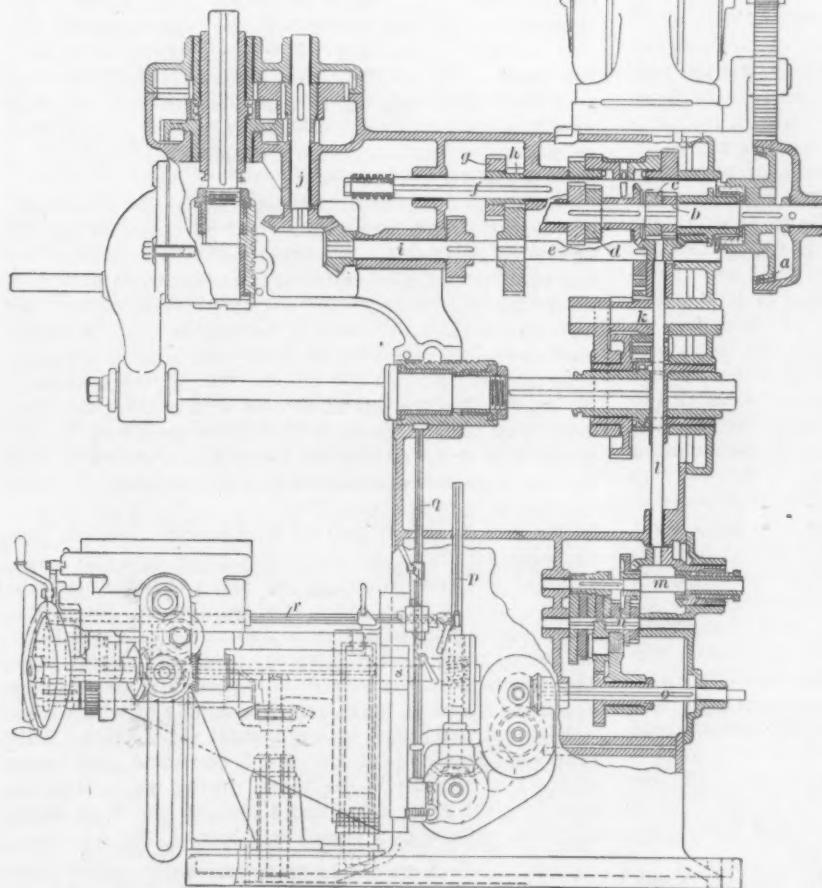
Sectional Elevation of the No. 5 Ingersoll Combined Knee Type Miller.
